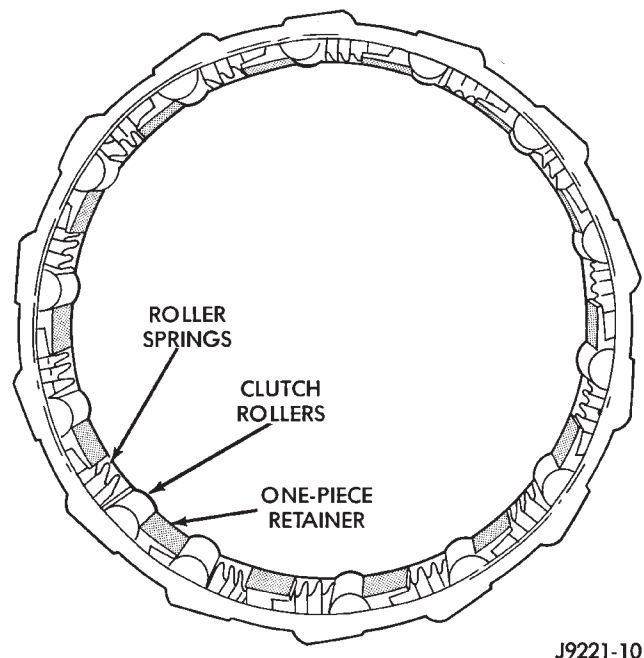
Overrunning Clutch Roller And Spring Position In Retainer
